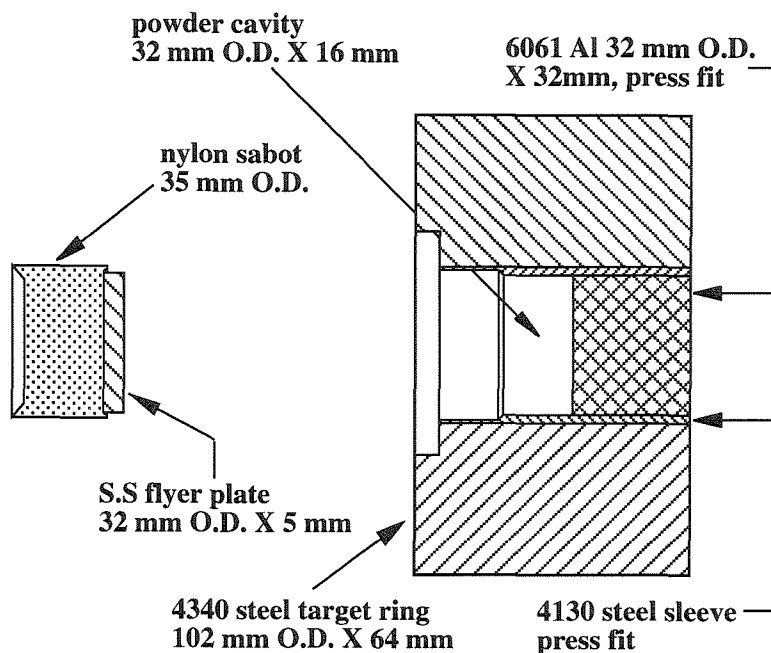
Target fixture and flyer plate assembly used in the shock consolidation. Note that only the sample, and not the containment assembly, is impacted.
